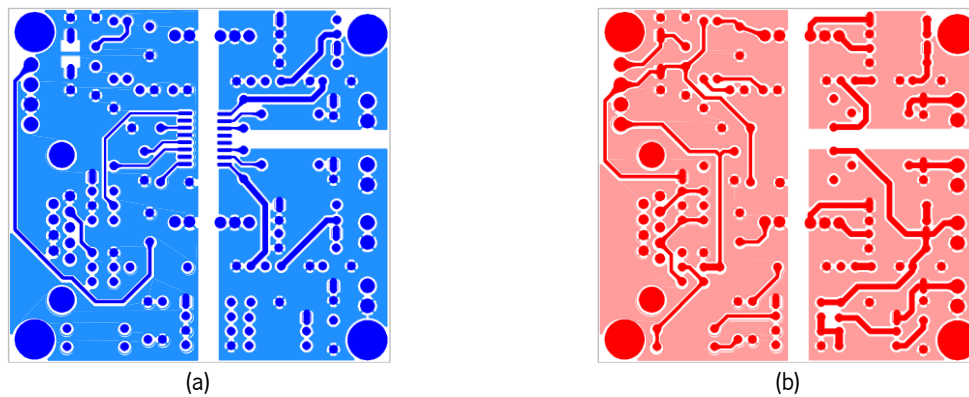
Driver circuit PCB layout design: (a) Top layout; (b) Bottom layout.
